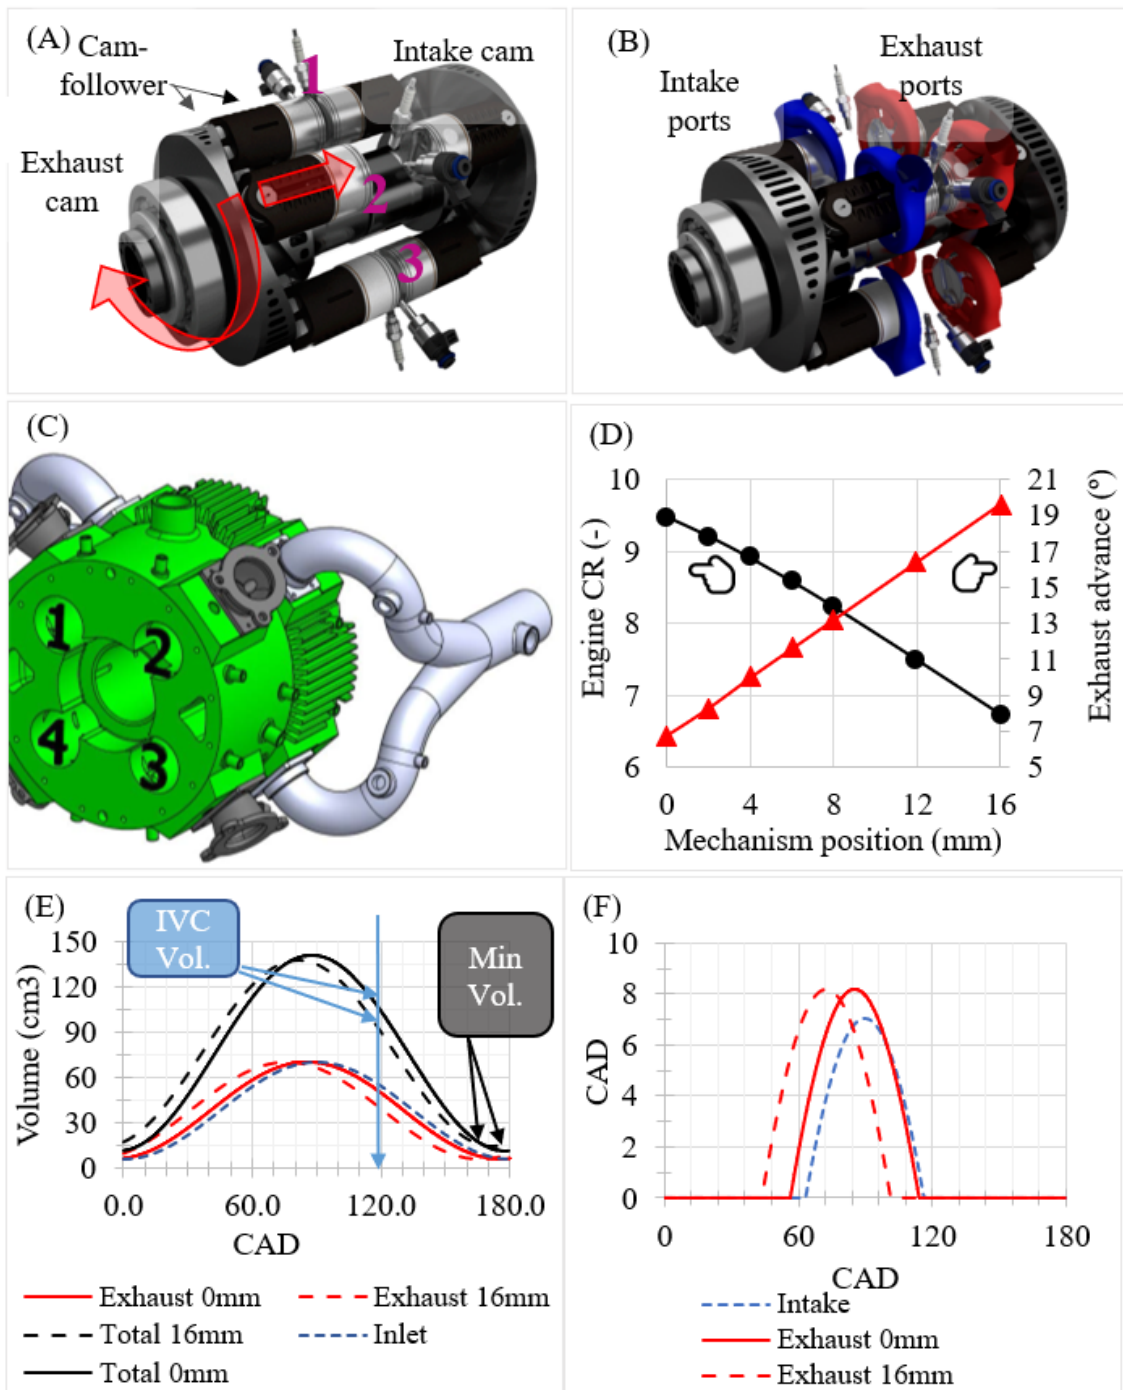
Engine configuration and VT&VCM examples. (A) Partially disassembled engine for easy schematic view. (B) Partially disassembled engine for easy schematic view of intake and exhaust ports. (C) Caption of external exhaust system and block. (D) Engine compression ratio and exhaust advance as a function of the mechanism position (mm). (E) Intake and exhaust cylinders volume as well as total volume variation with
